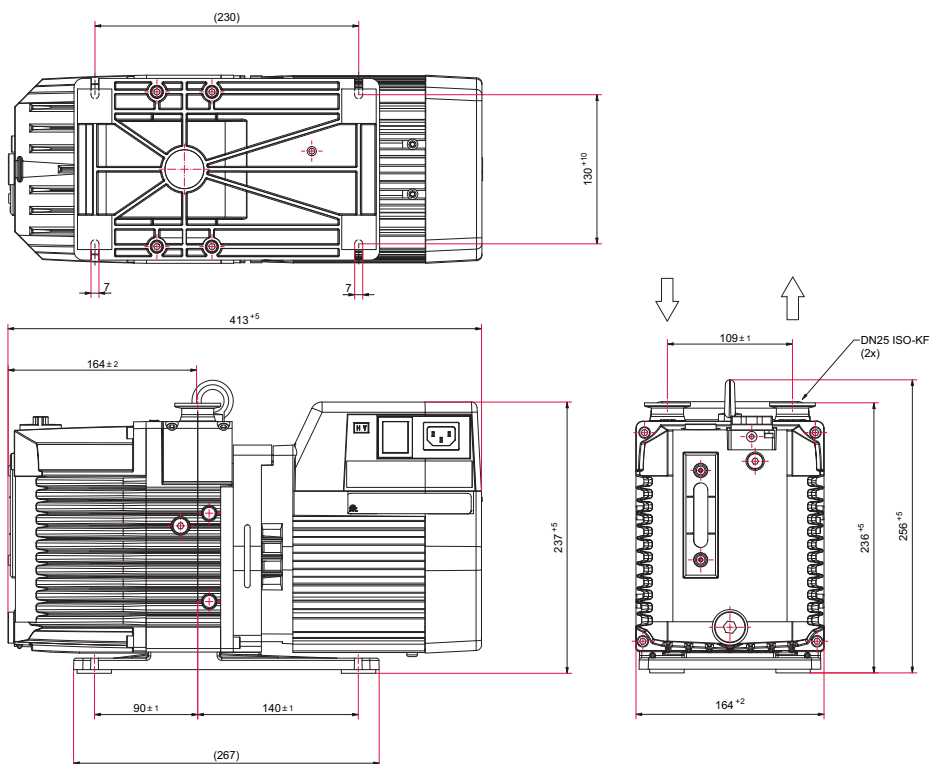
Dimensions DuoVane 6 with single-phase motor
